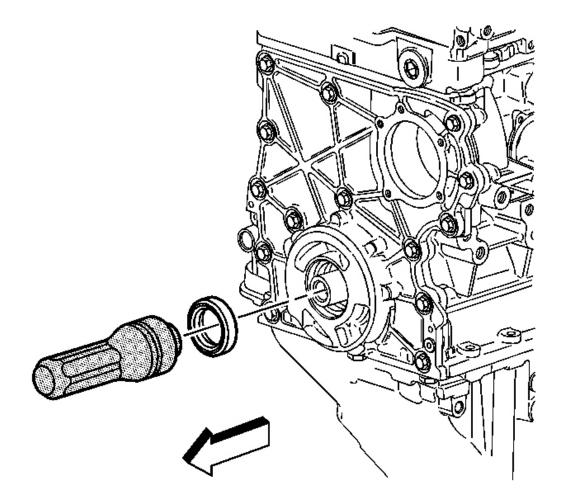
Installing Crankshaft Front Oil Seal Using J 44218 Courtesy of GENERAL MOTORS CORP.
